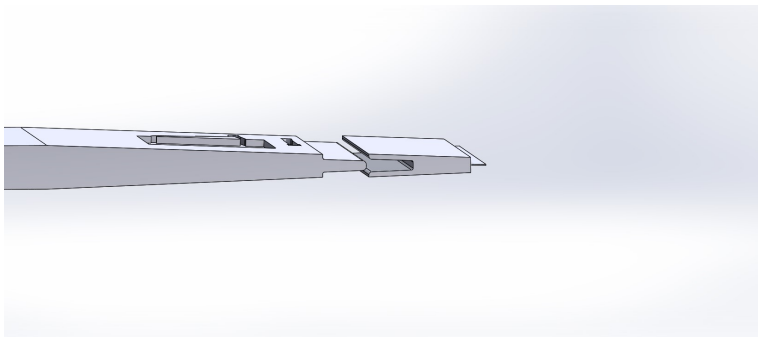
Exploded view of foil body and trailing edge tip with splitter plate
